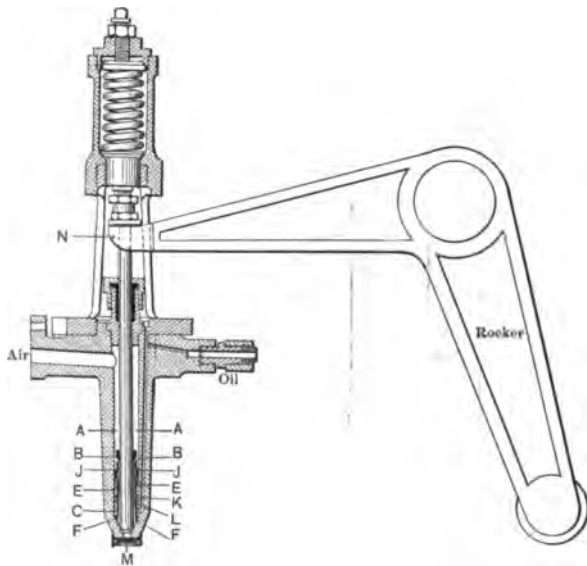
McIntosh & Seymour stationary Diesel fuel valve assembly.
